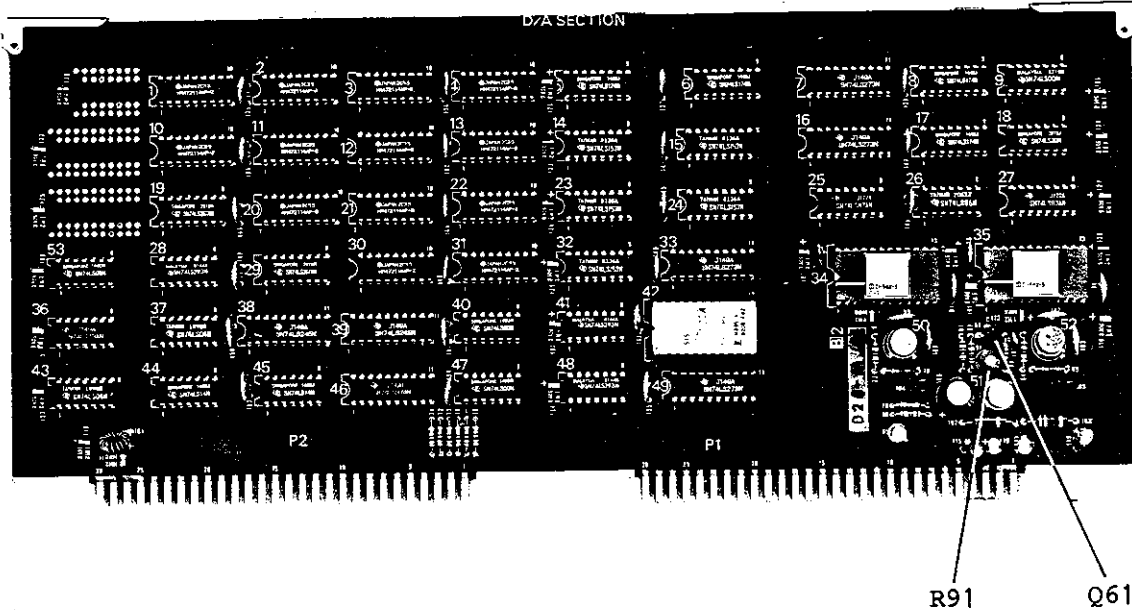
Adjustment on the D-A converter board (BGP-010188)
